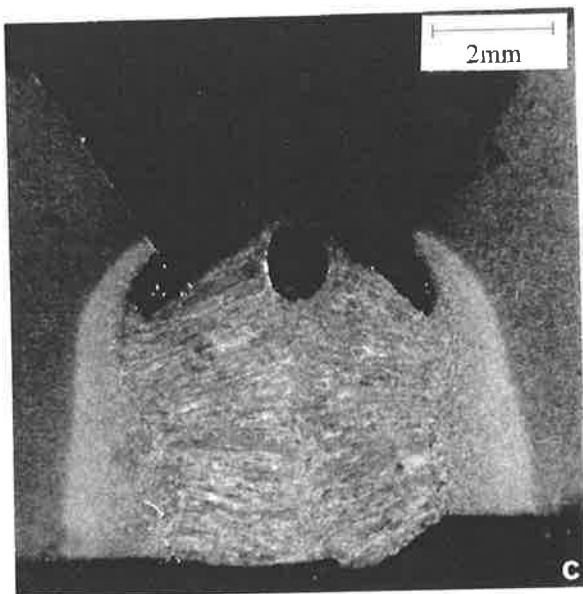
Macrograph of a weld with a hollow bead pore located near the top surface of the weld bead. Welding conditions: weld travel speed 520mm/min, welding current 185A, welding voltage 25V. Root gap 1.0mm and root face 2.5mm.
